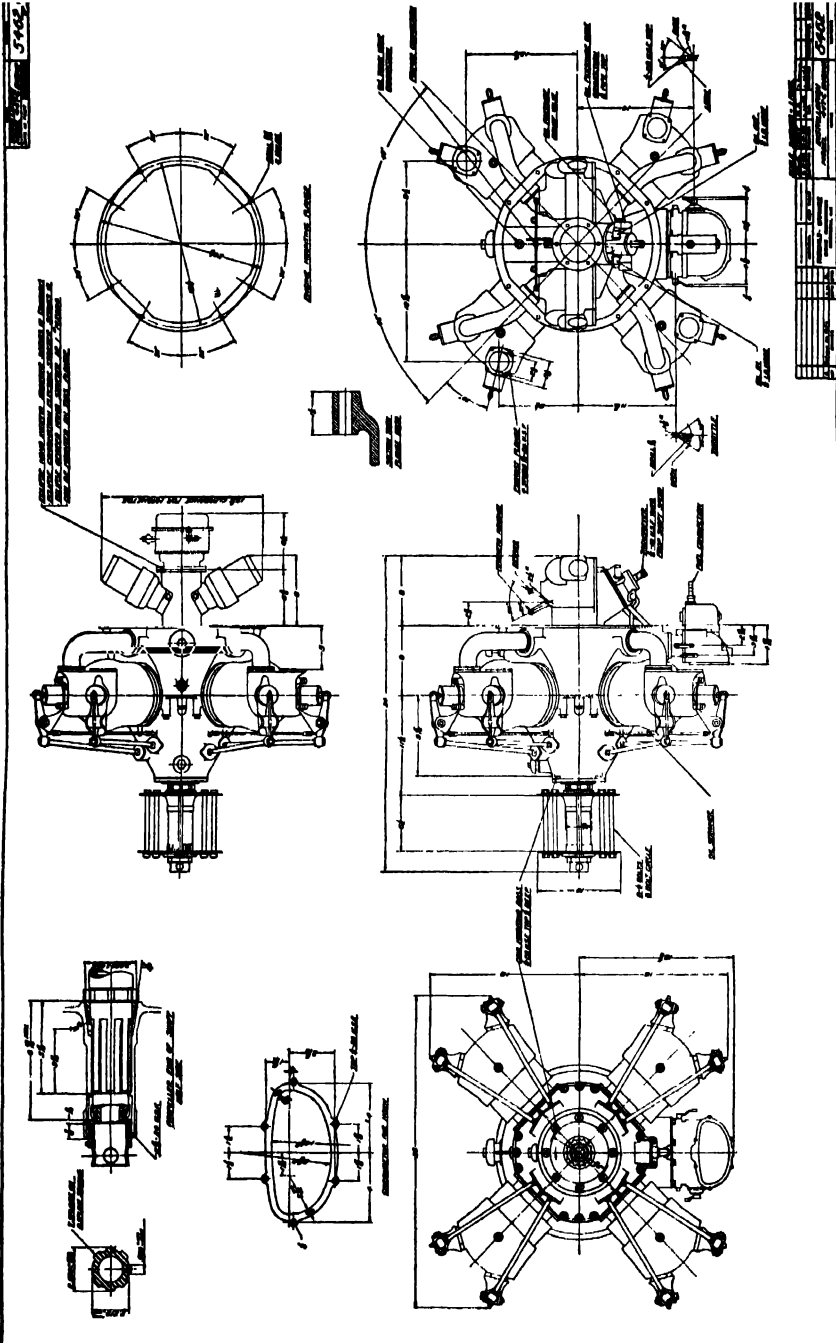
Installation Drawings of Fairchild-Camenz Engine.
